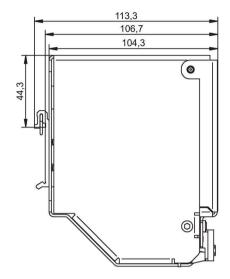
Dimension drawing 6EP4131-0GB00-0AY0
